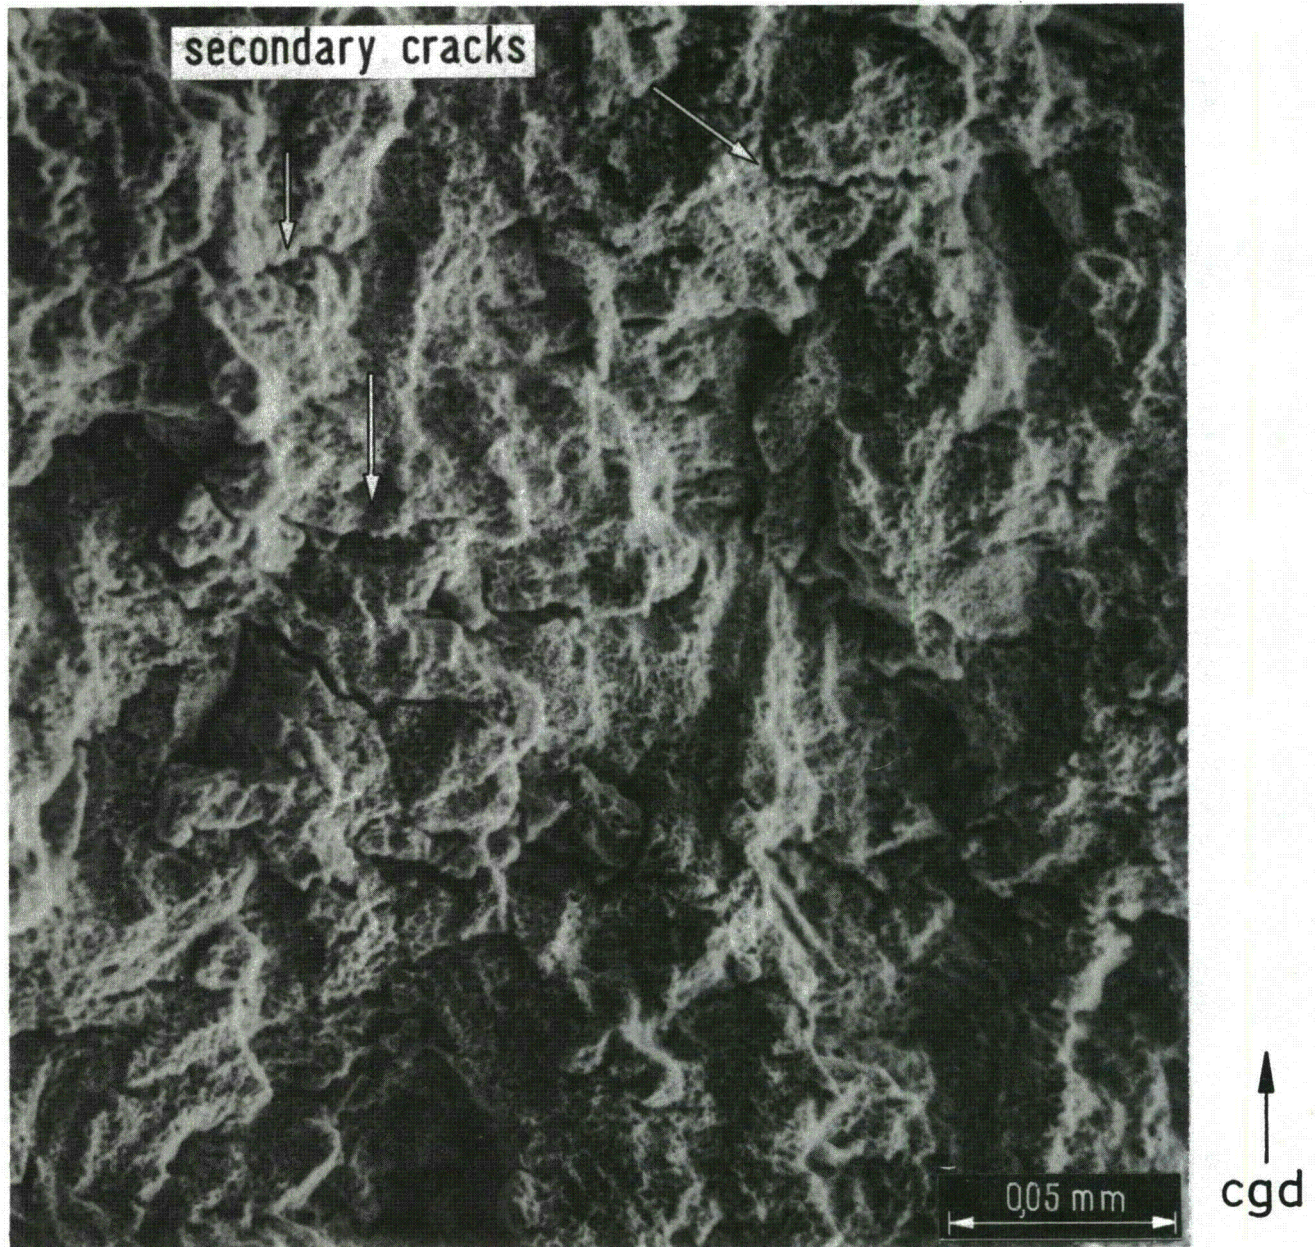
Fracture surface with secondary cracking transverse to main direction of crack growth
